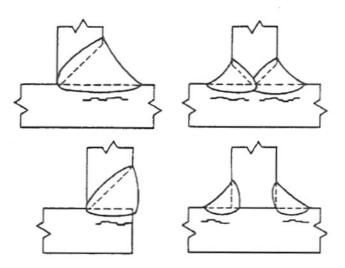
Weld Configuration Which May Cause Lamellar Tearing
